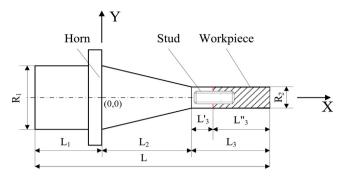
Sketch of the overall design of the workpiece and the ultrasonic horn.
